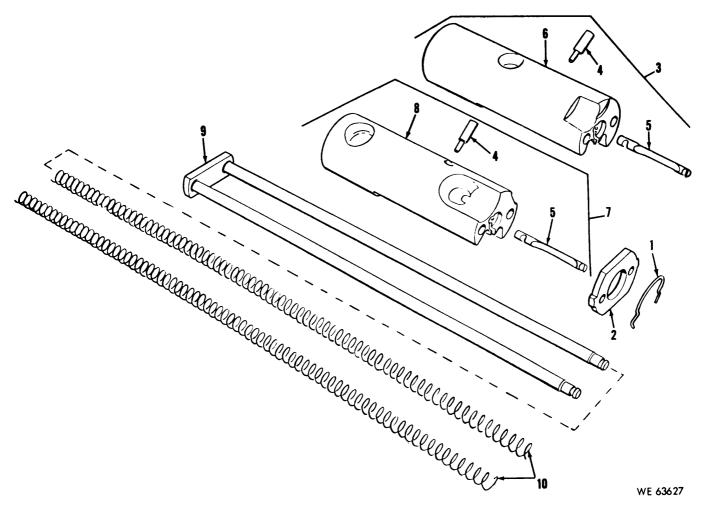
Bolt and guide rod group, M3 and M3A1-exploded view.
